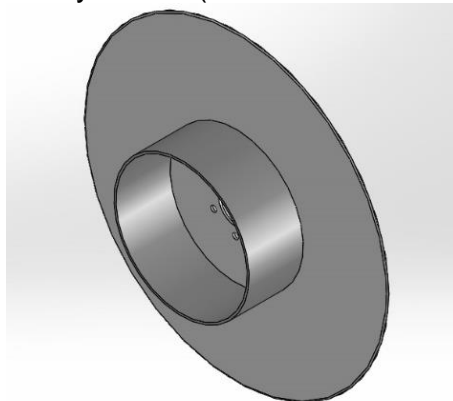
Axonometric isometric CAD model view of large diameter disc cutter
